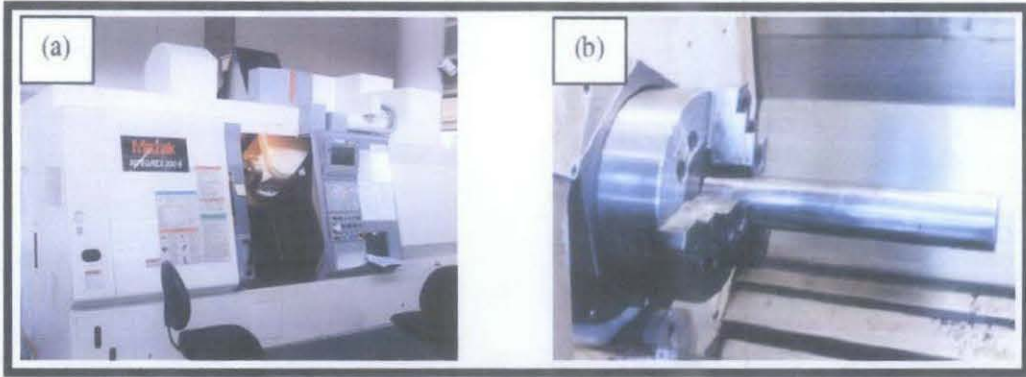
(a) MAZAK CNC Lathe Machine. (b) Tool steel H13 being lathe.
